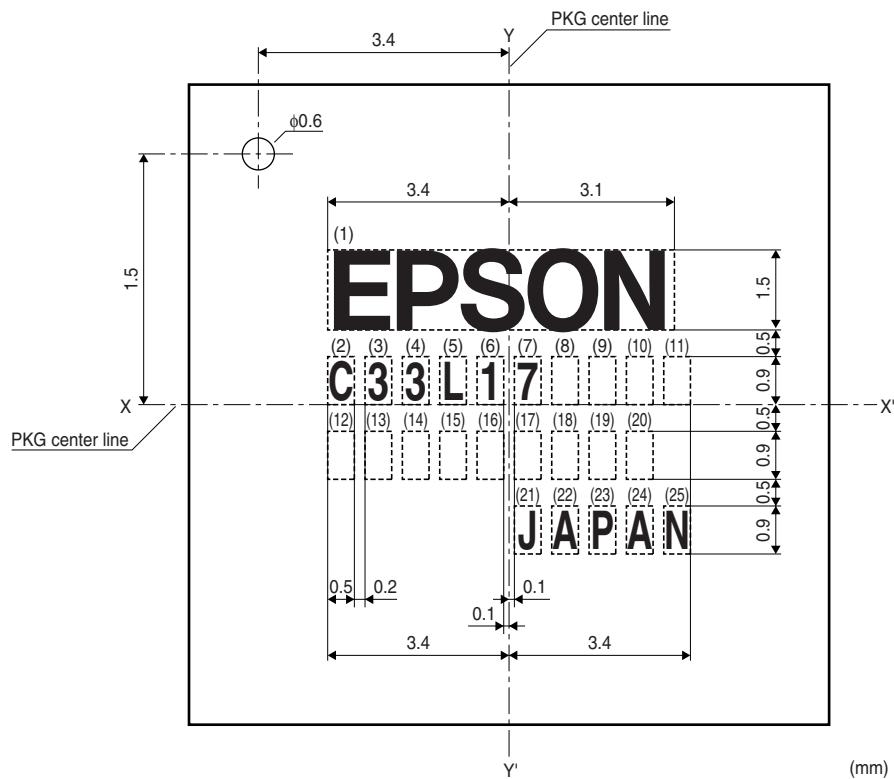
PFBGA-180pin Package Marking
